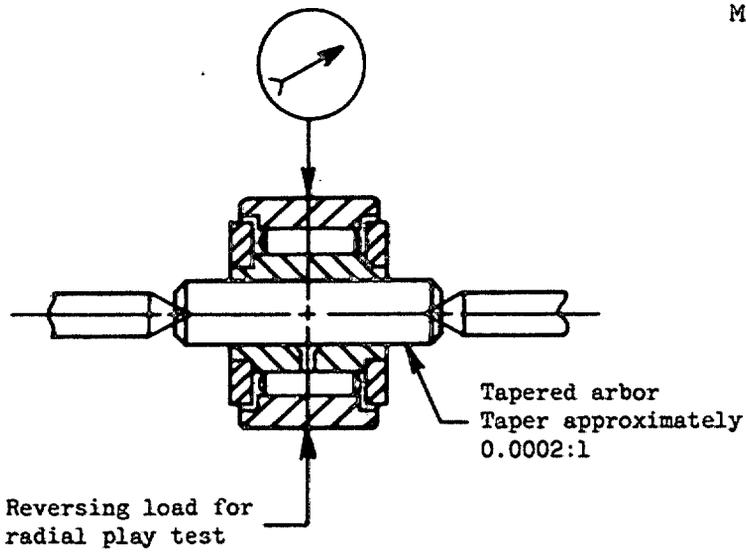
Radial play and radial runout tests for types V, VI and X bearings.
